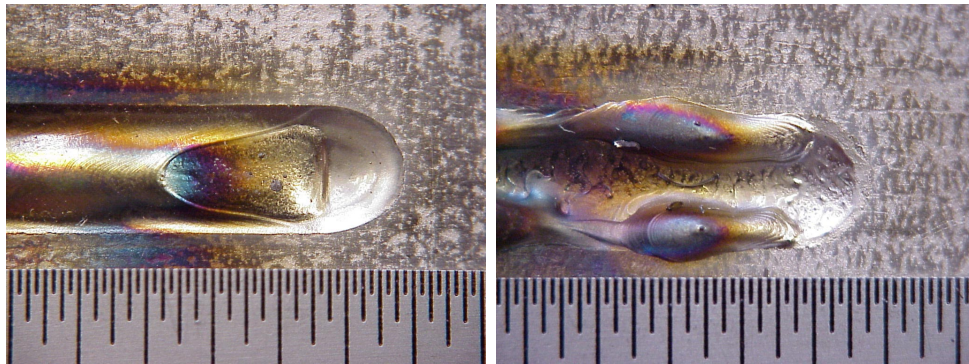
Gouging region for the welds of Figure 6-17. The one on the left corresponds to low sulfur and the one to the right to high sulfur. Both weld beads have the same size. A double humping defect is seen on the weld on the right.
